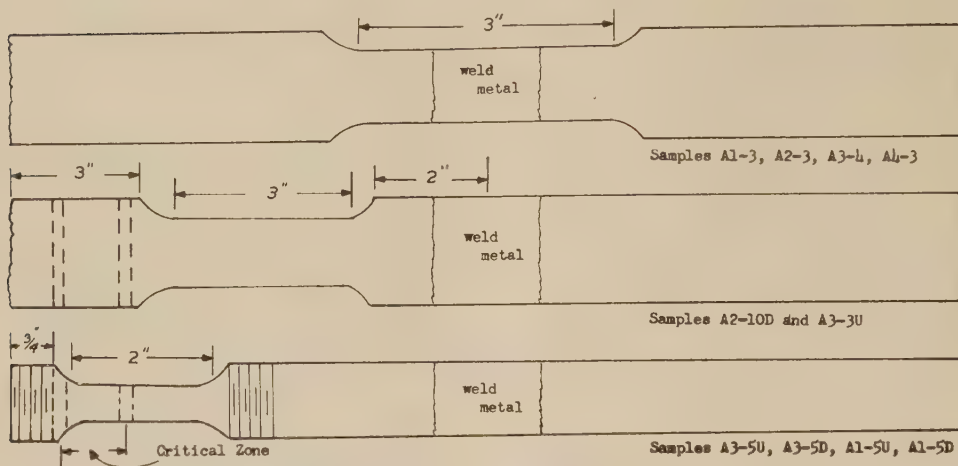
(b) LOCATION OF GAGE SECTION OF TENSILE SPECIMENS OF PIPE SECTION
